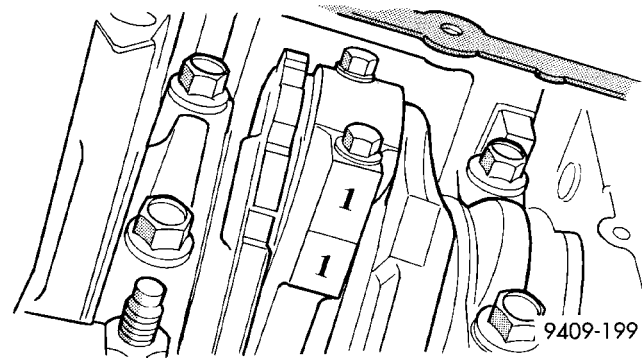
Identify Connecting Rod to Cylinder - Typical
